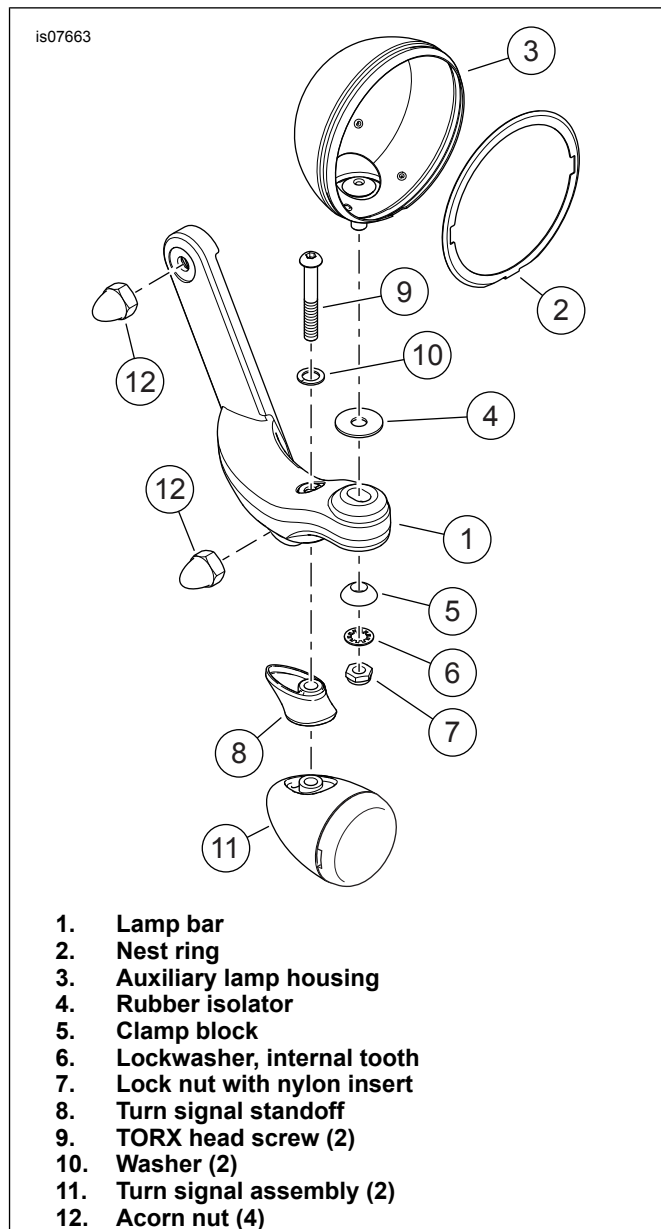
Auxiliary Lamp Assembly (Wiring not shown)
